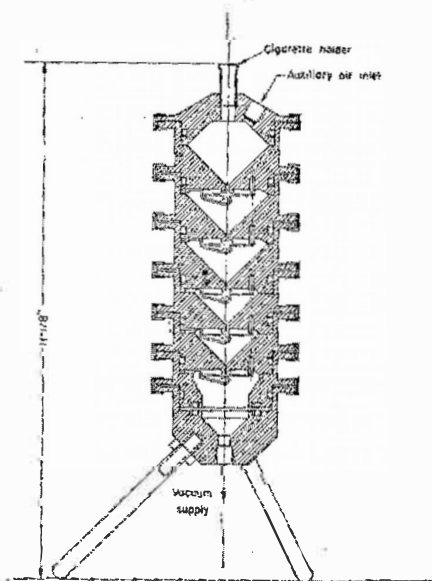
Assembly drawing of new stainless steel cascade impactor.
